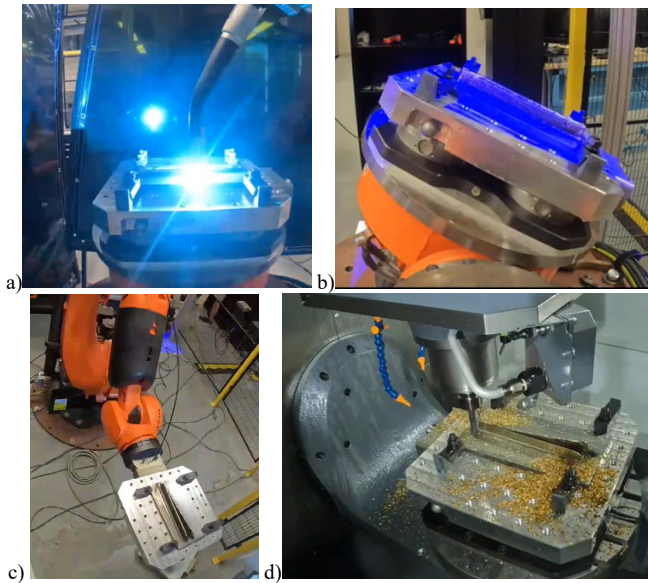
Hybrid manufacturing cell in operation demonstrating a) material deposition, b) metrology, c) part transfer and d) machining.
